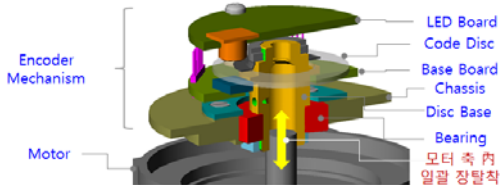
The Proposed Component Type Encoder which is possible to Batch Processing into a Motor Shaft
